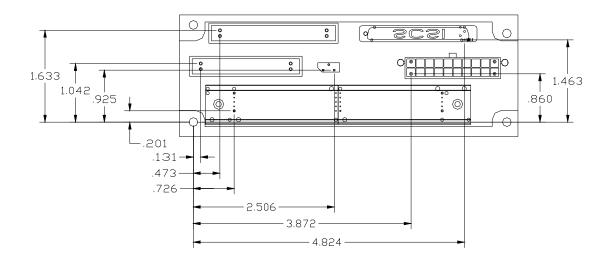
Peripheral Bay Board (Chassis Side) Connector Layoui
